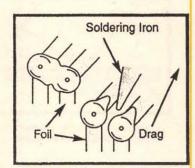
You can sometimes clear a solder bridge by dragging the hot soldering iron tip across the bridge.
